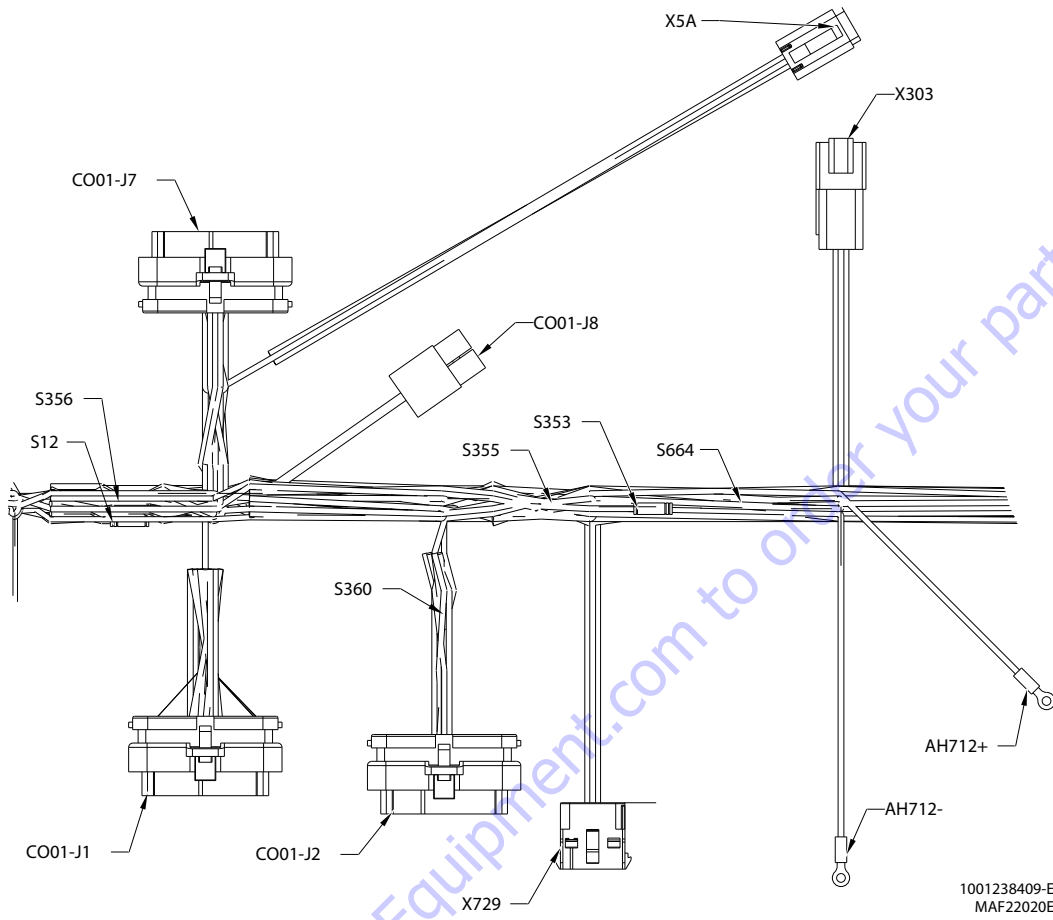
Platform Box Harness - Sheet 3 of 6
